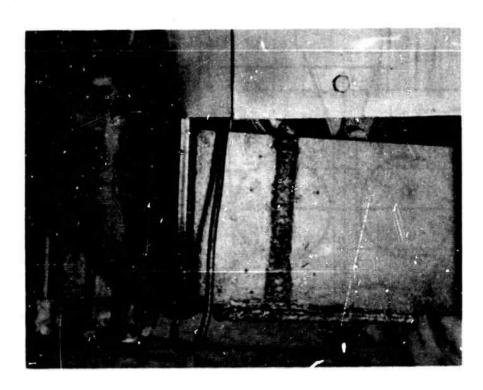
WELD ON FRAME. NOTE REINFORGING FISHPLATF.
